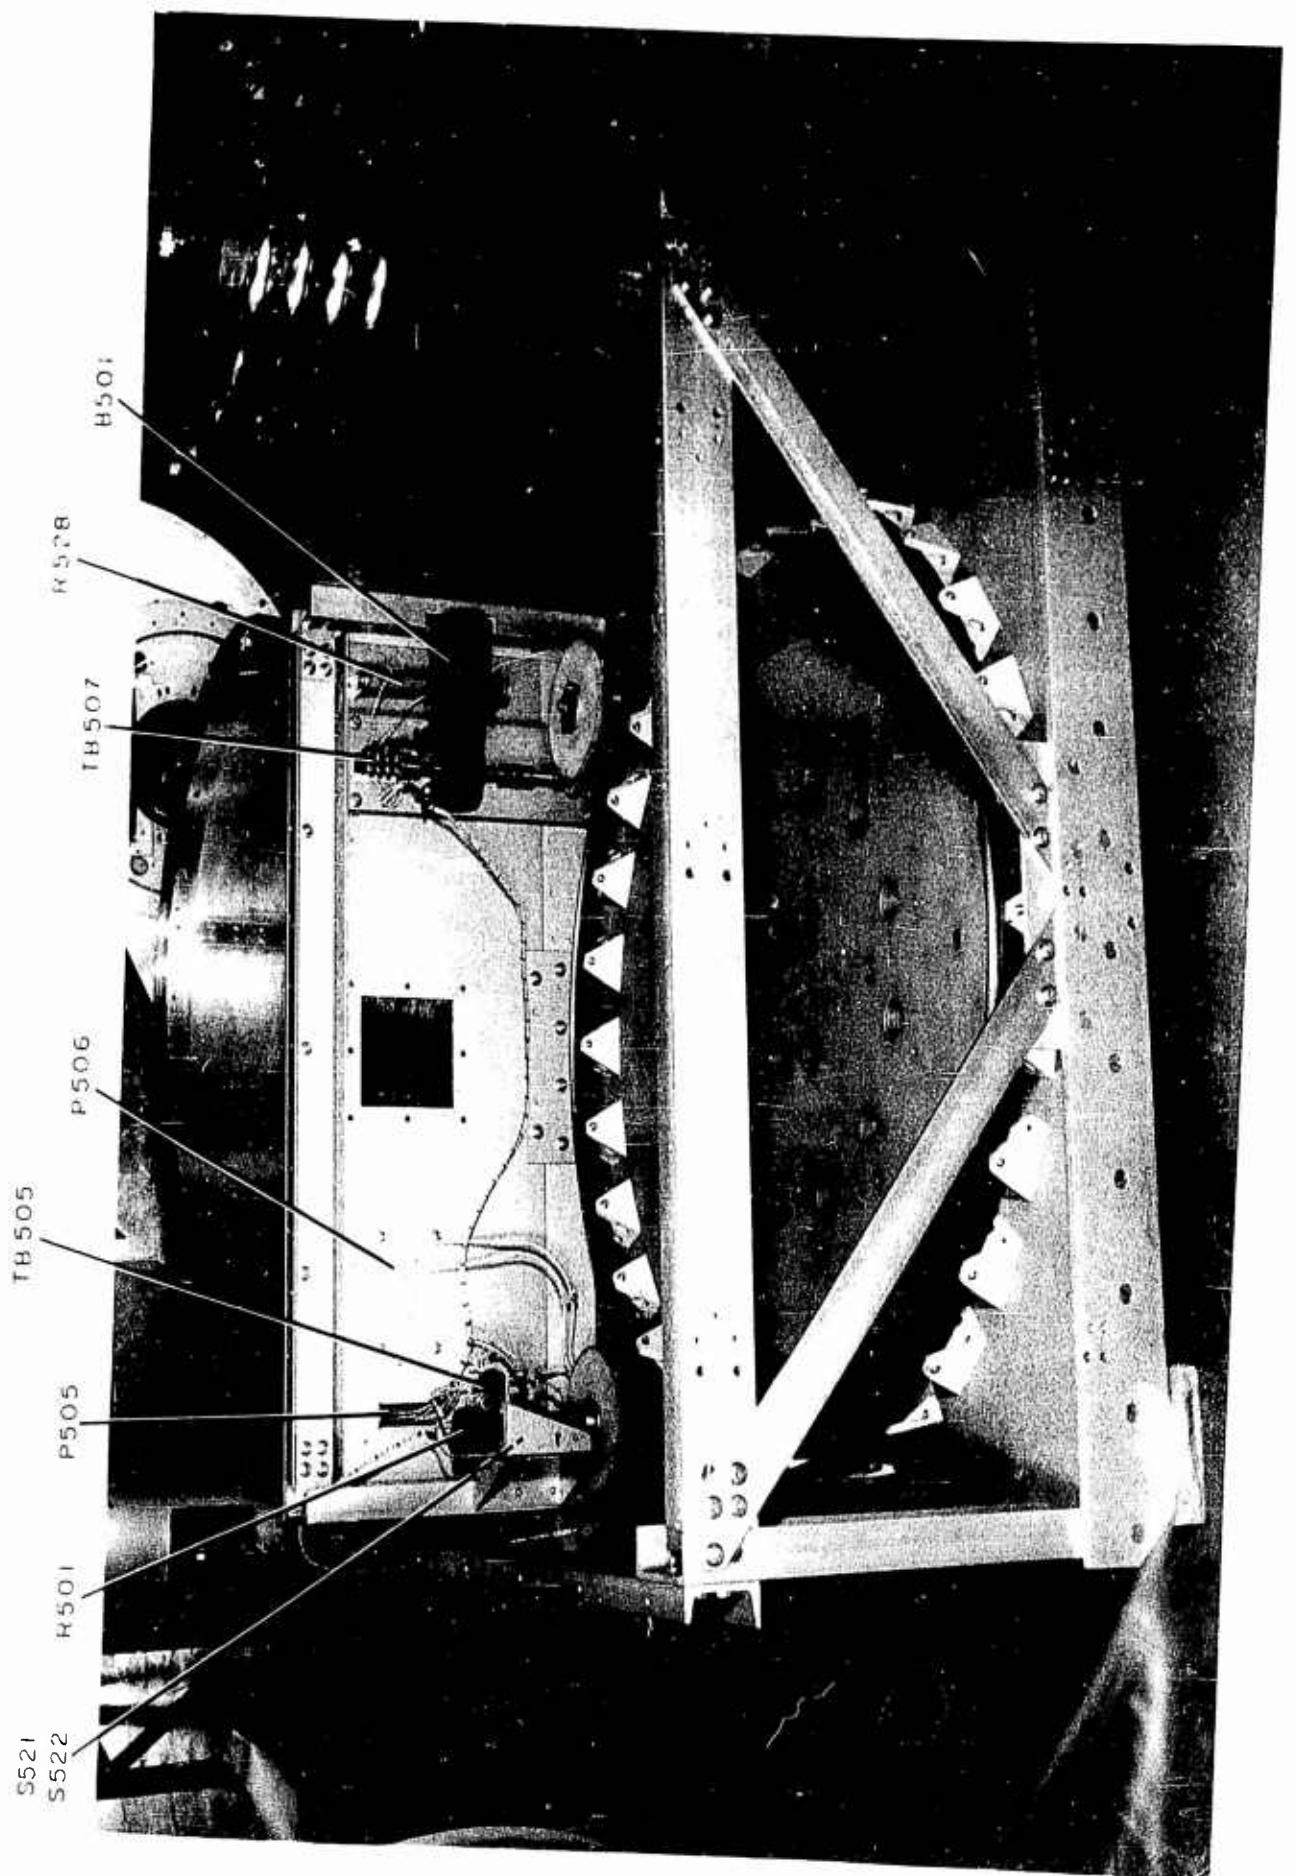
Grid Drawer, Disassembled, Showing Grid Tuning Servo Drive System.
